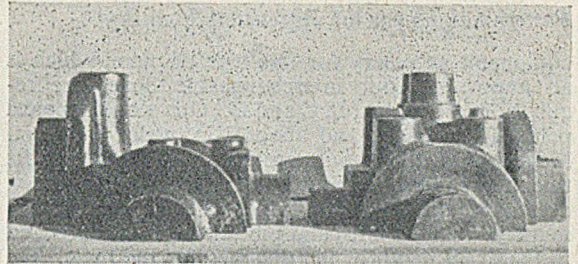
Examples of Patterns Suitable for Embossing as  $\frac{3}{8}$ -in. thick Shells and mounting on a Plate
